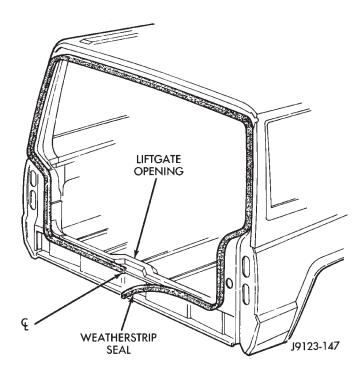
Liftgate Opening Weatherstrip Seal Removal/Installation
